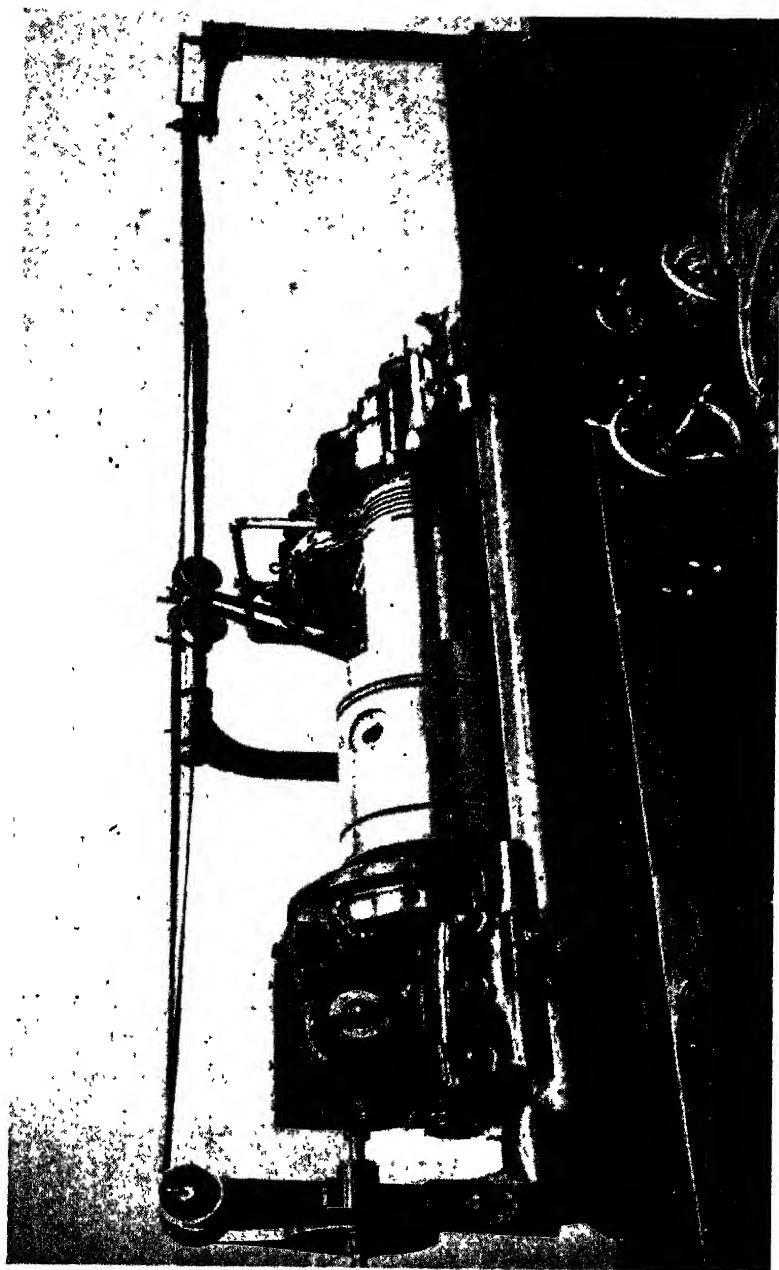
PLAIN GRINDING MACHINE OPERATING ON A LARGE PISTON
